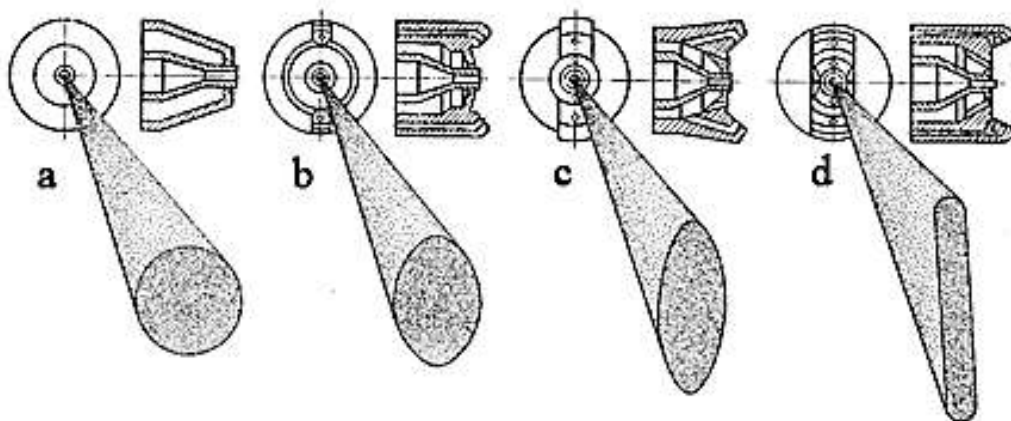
Spray heads of pneumopainting sprayers, shape of jet and prints of plumes: a – head without additional holes; b – head with two additional holes; c – head with four additional holes; d – head with eight additional holes
